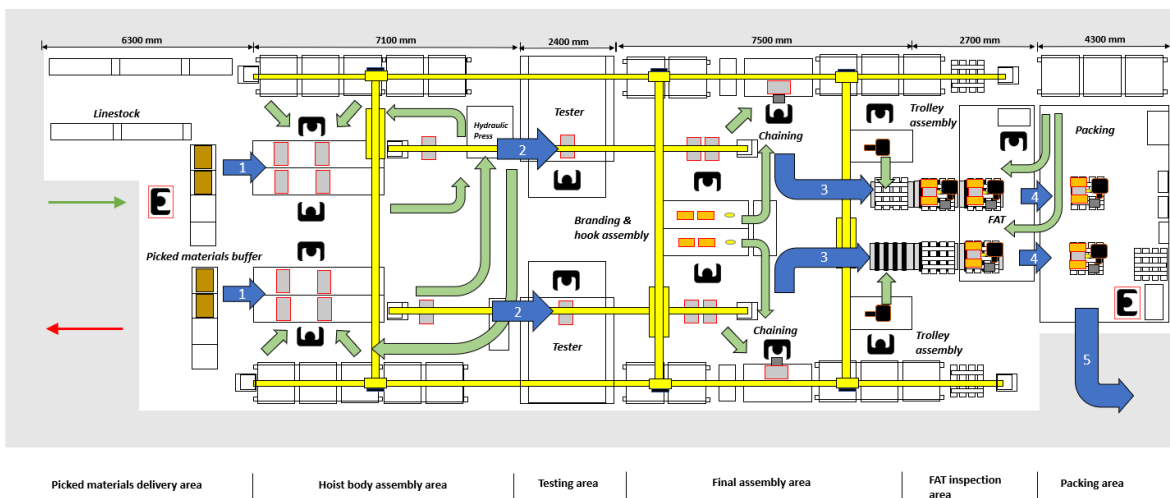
Blank paper scenario #2 assembly area layout (CTO hoists)
